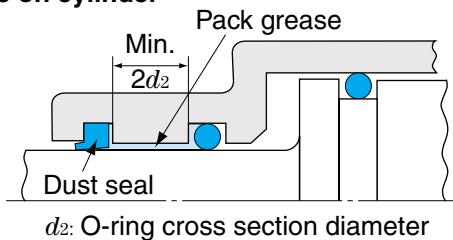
Typical installation of O-ring for dynamic sealing
